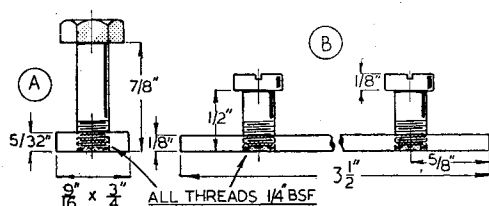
"A"—reversed form of T-bolt; "B"—flat strip fitted with screws
